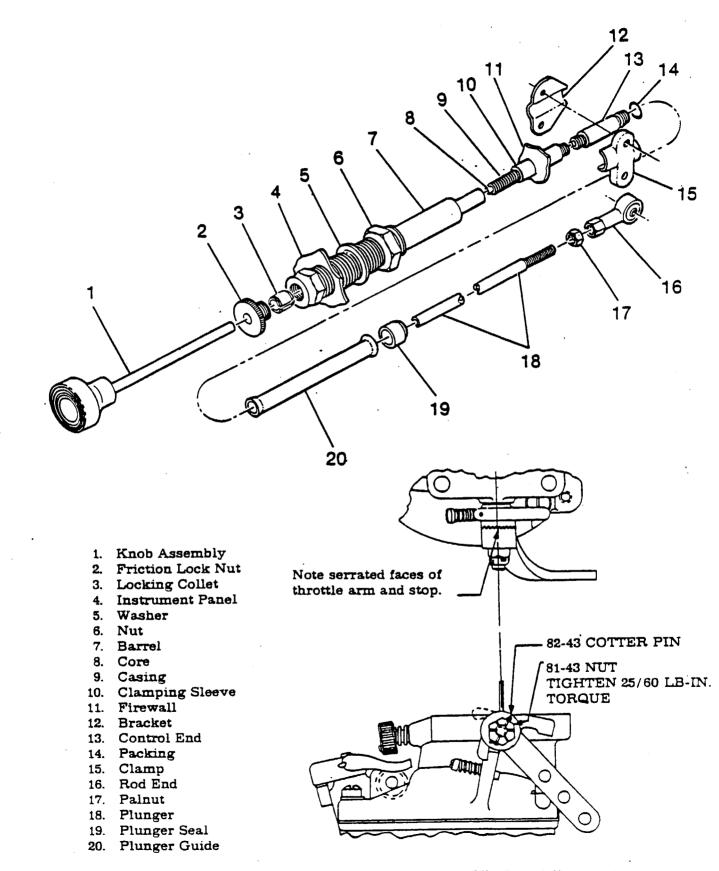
Throttle Control and Throttle Arm to Idle Stop Adjustment
